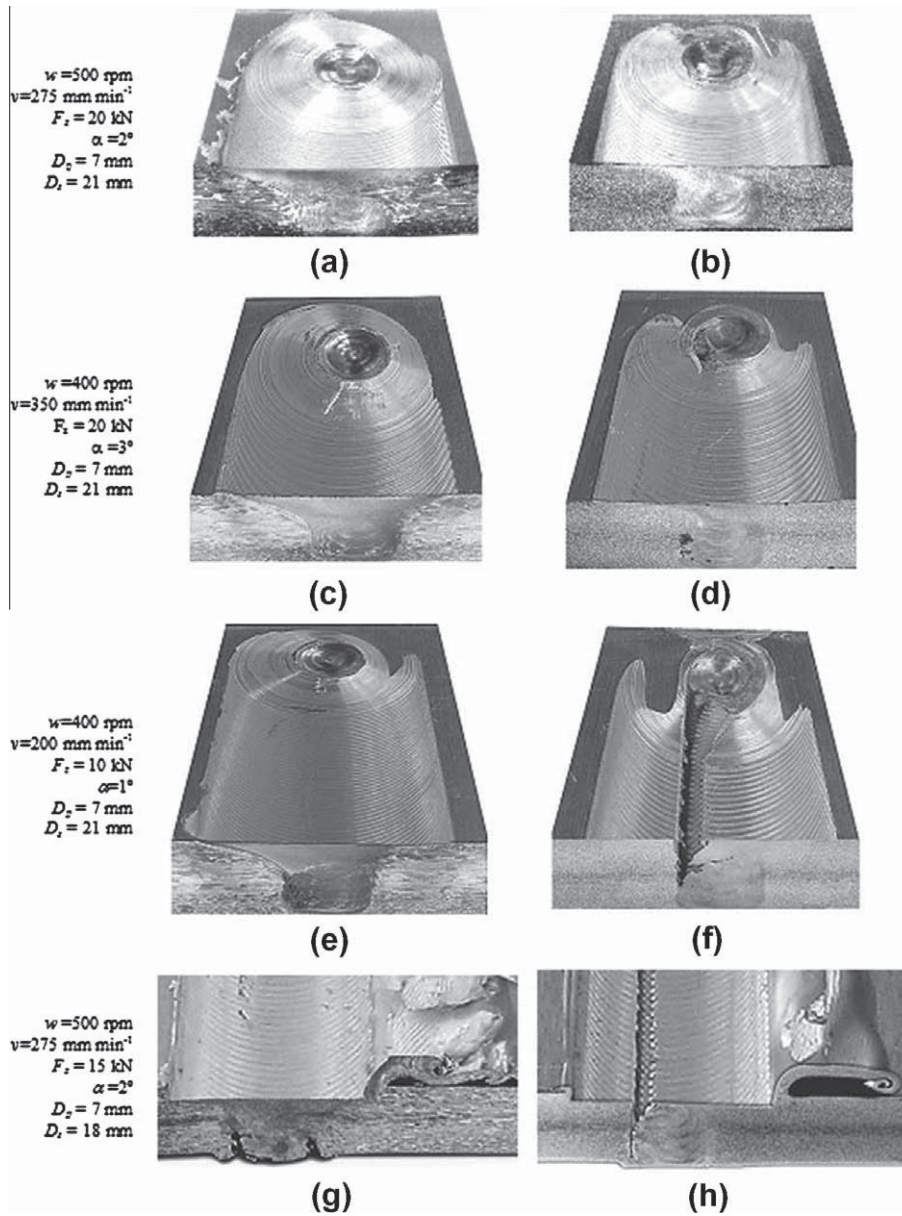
Top views and cross-sections of AA 6082 (a, c, e and g) and AA 5083 (b, d, f and h) welds.
